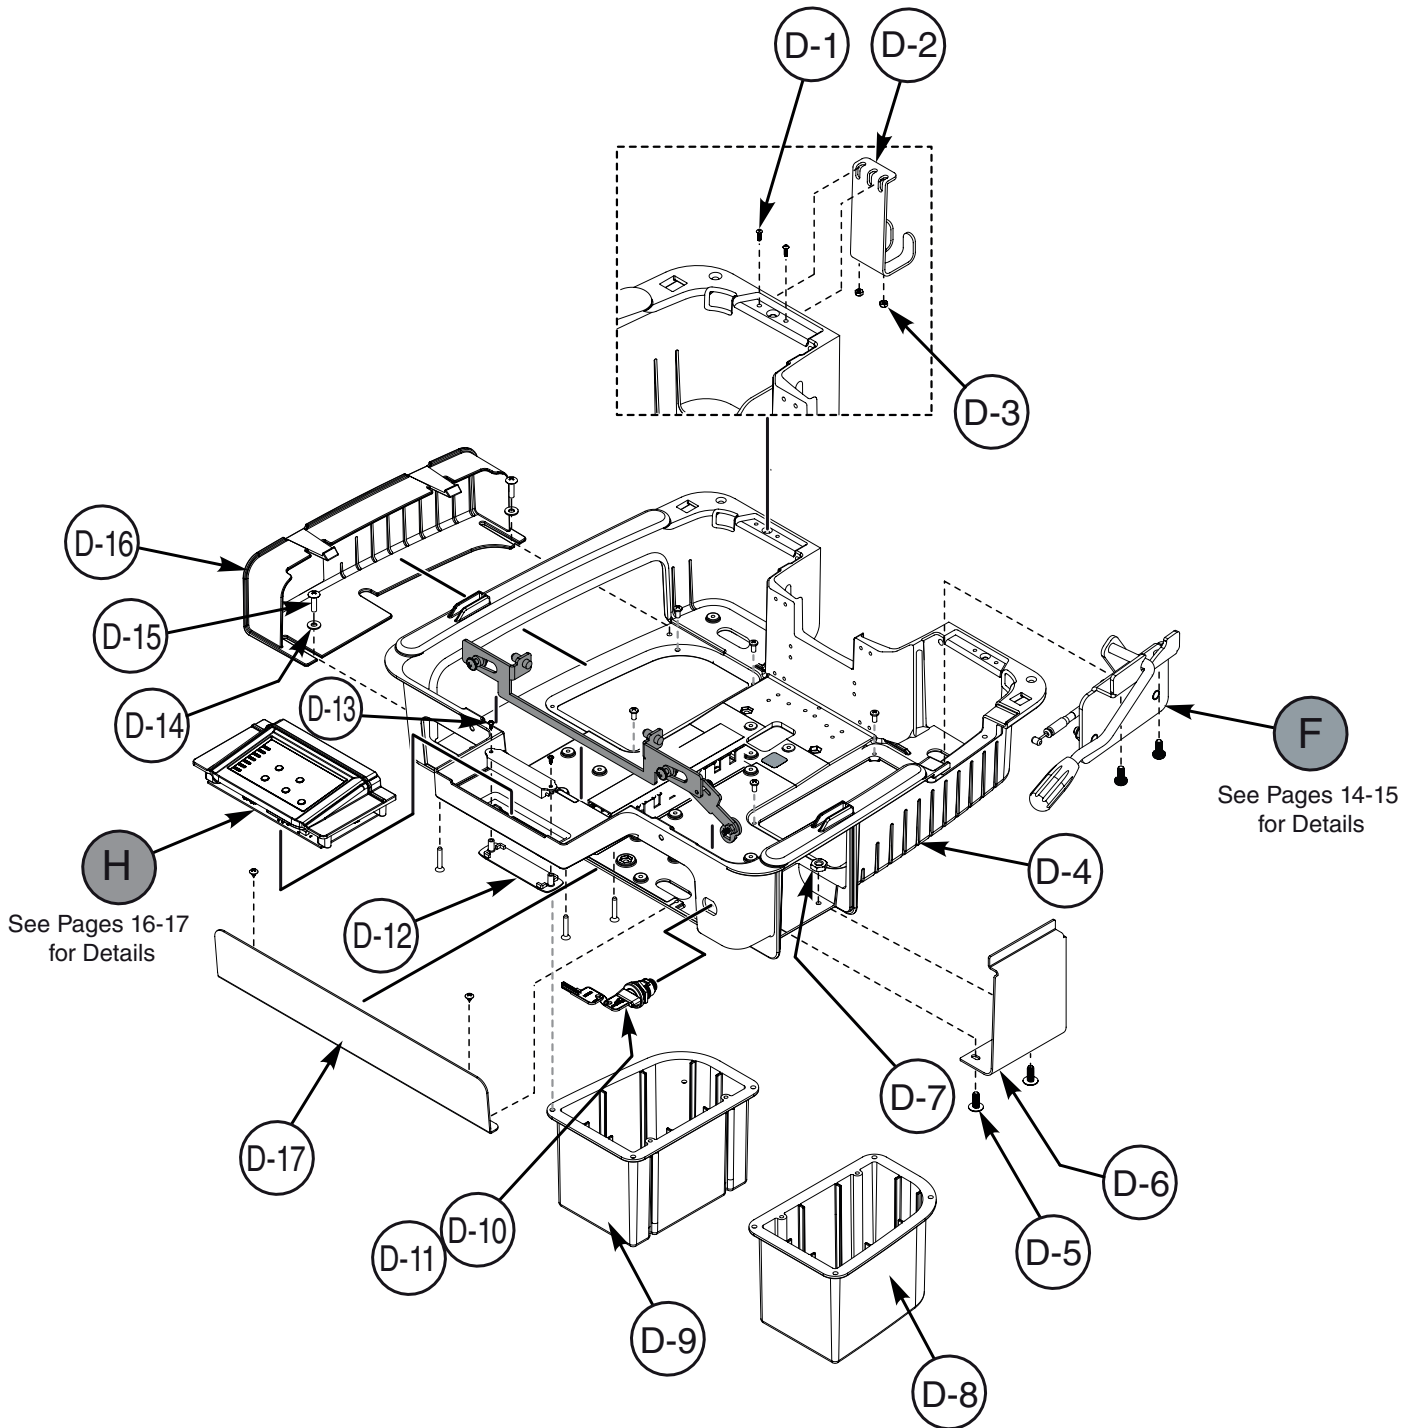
FIGURE D: WIRING TRAY ASSEMBLY - EXTERIOR
